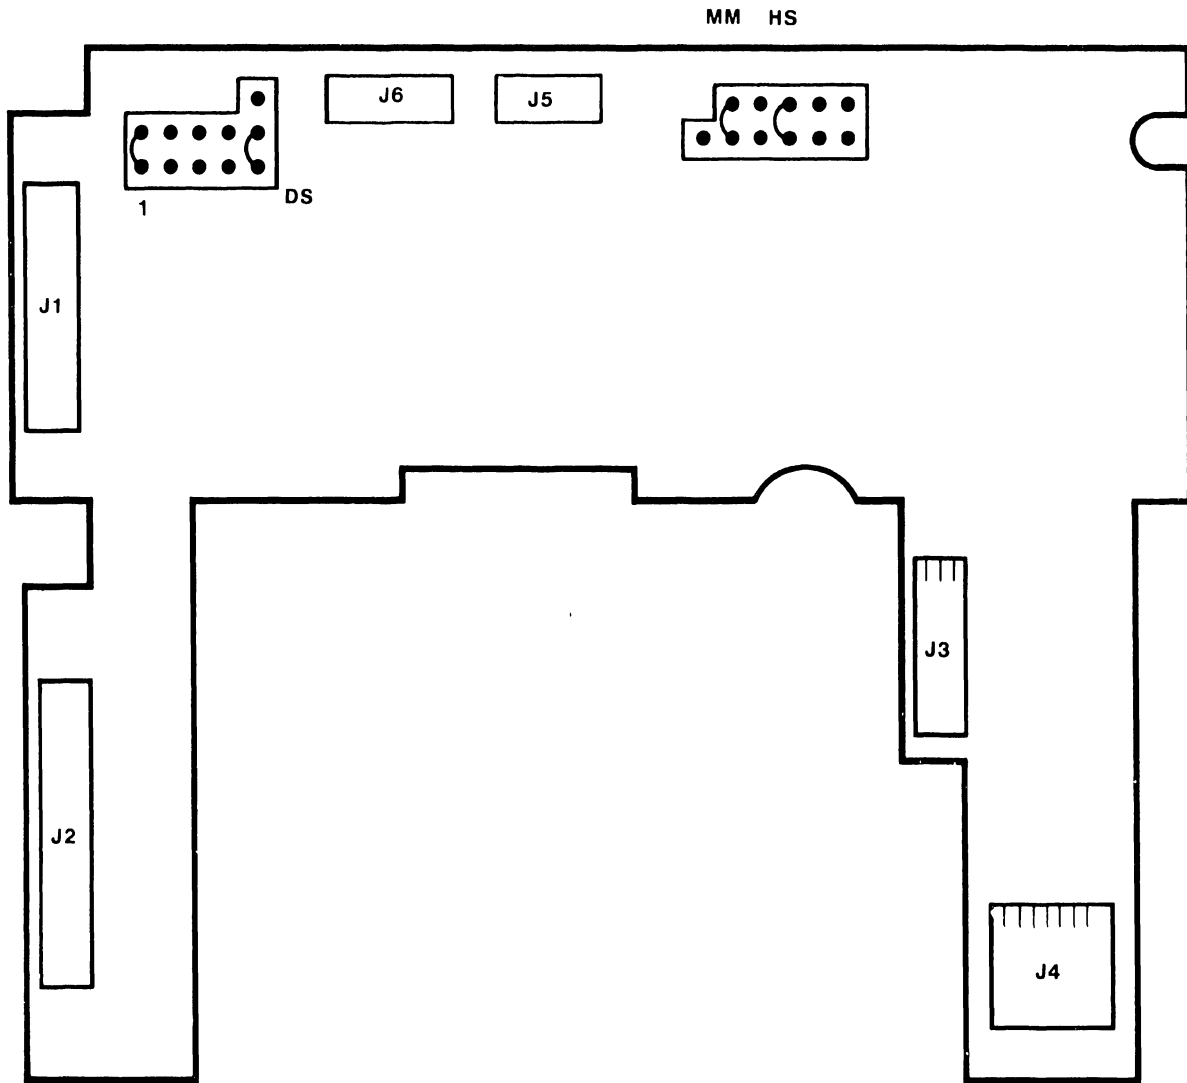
5-1/4 Inch Diskette Drive Printed Circuit Board
